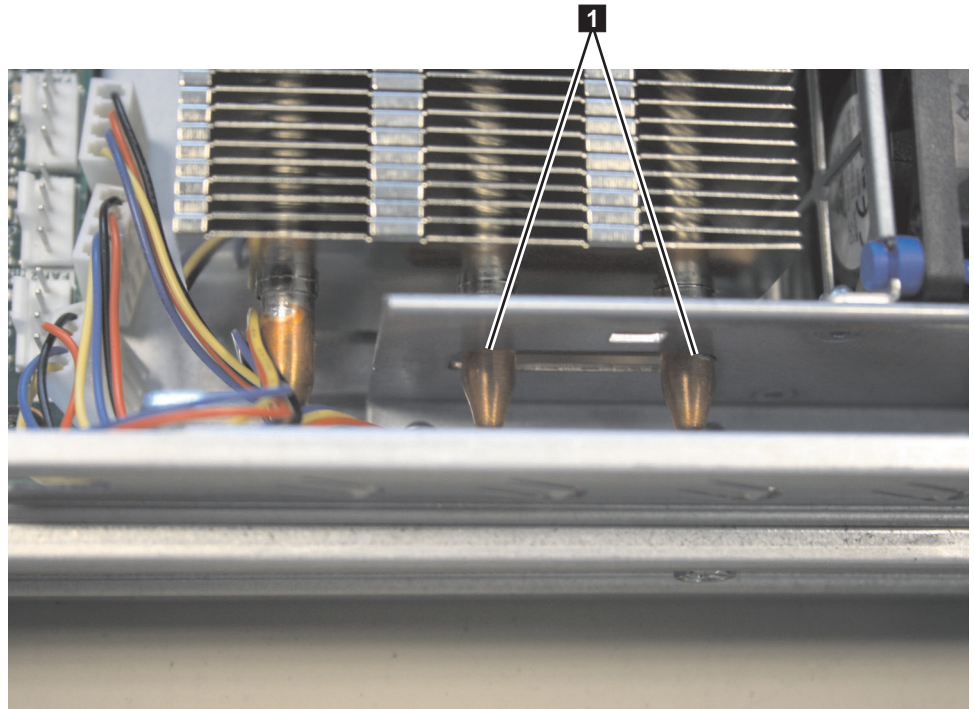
Alignment pins on the SAN Volume Controller 2145-8A4 heat-exchanger assembly
